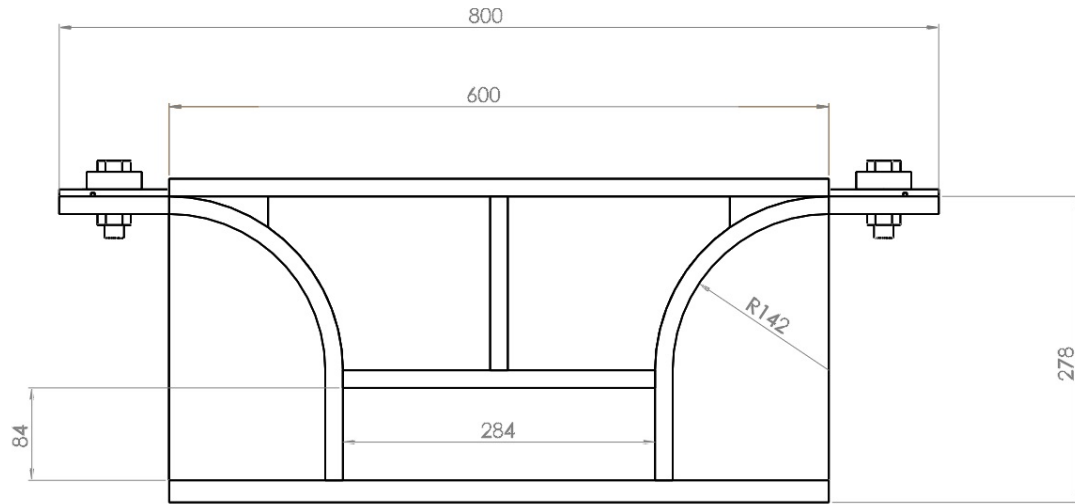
The layout of the support frame (dimensions in millimeters)
